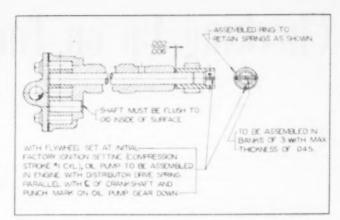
Gear type of oil-pump assembly (Pontiac).
